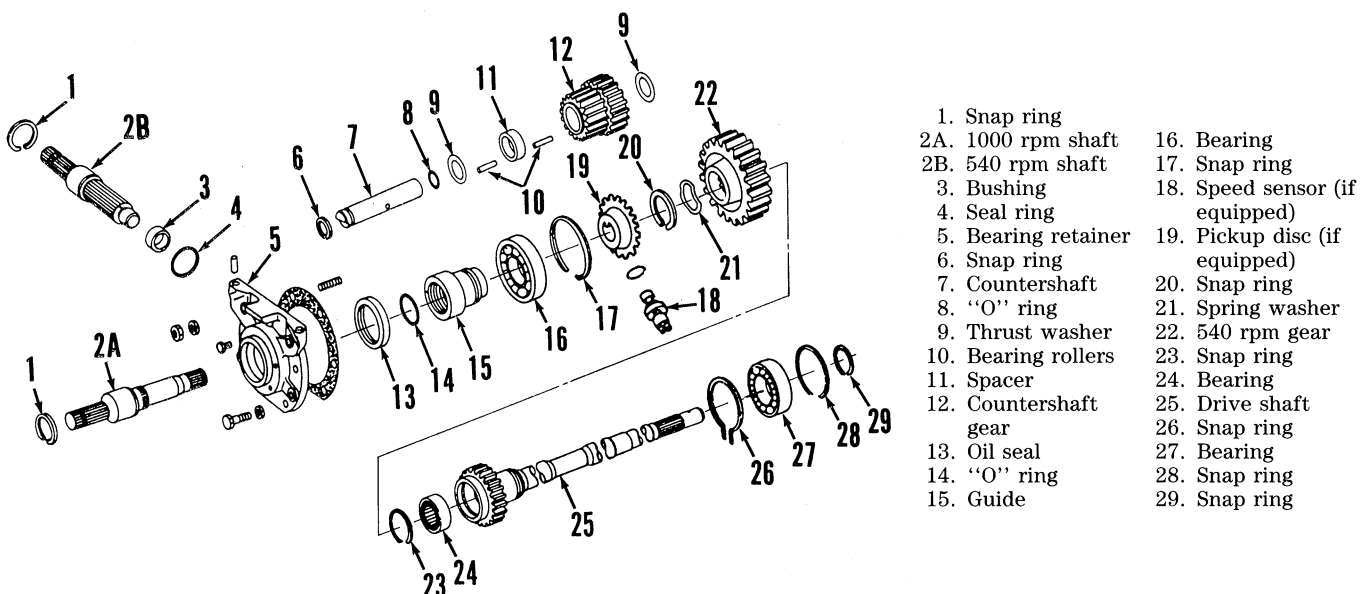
Exploded view of reduction gears, output shafts and related parts used on all models equipped with dual-speed pto.
